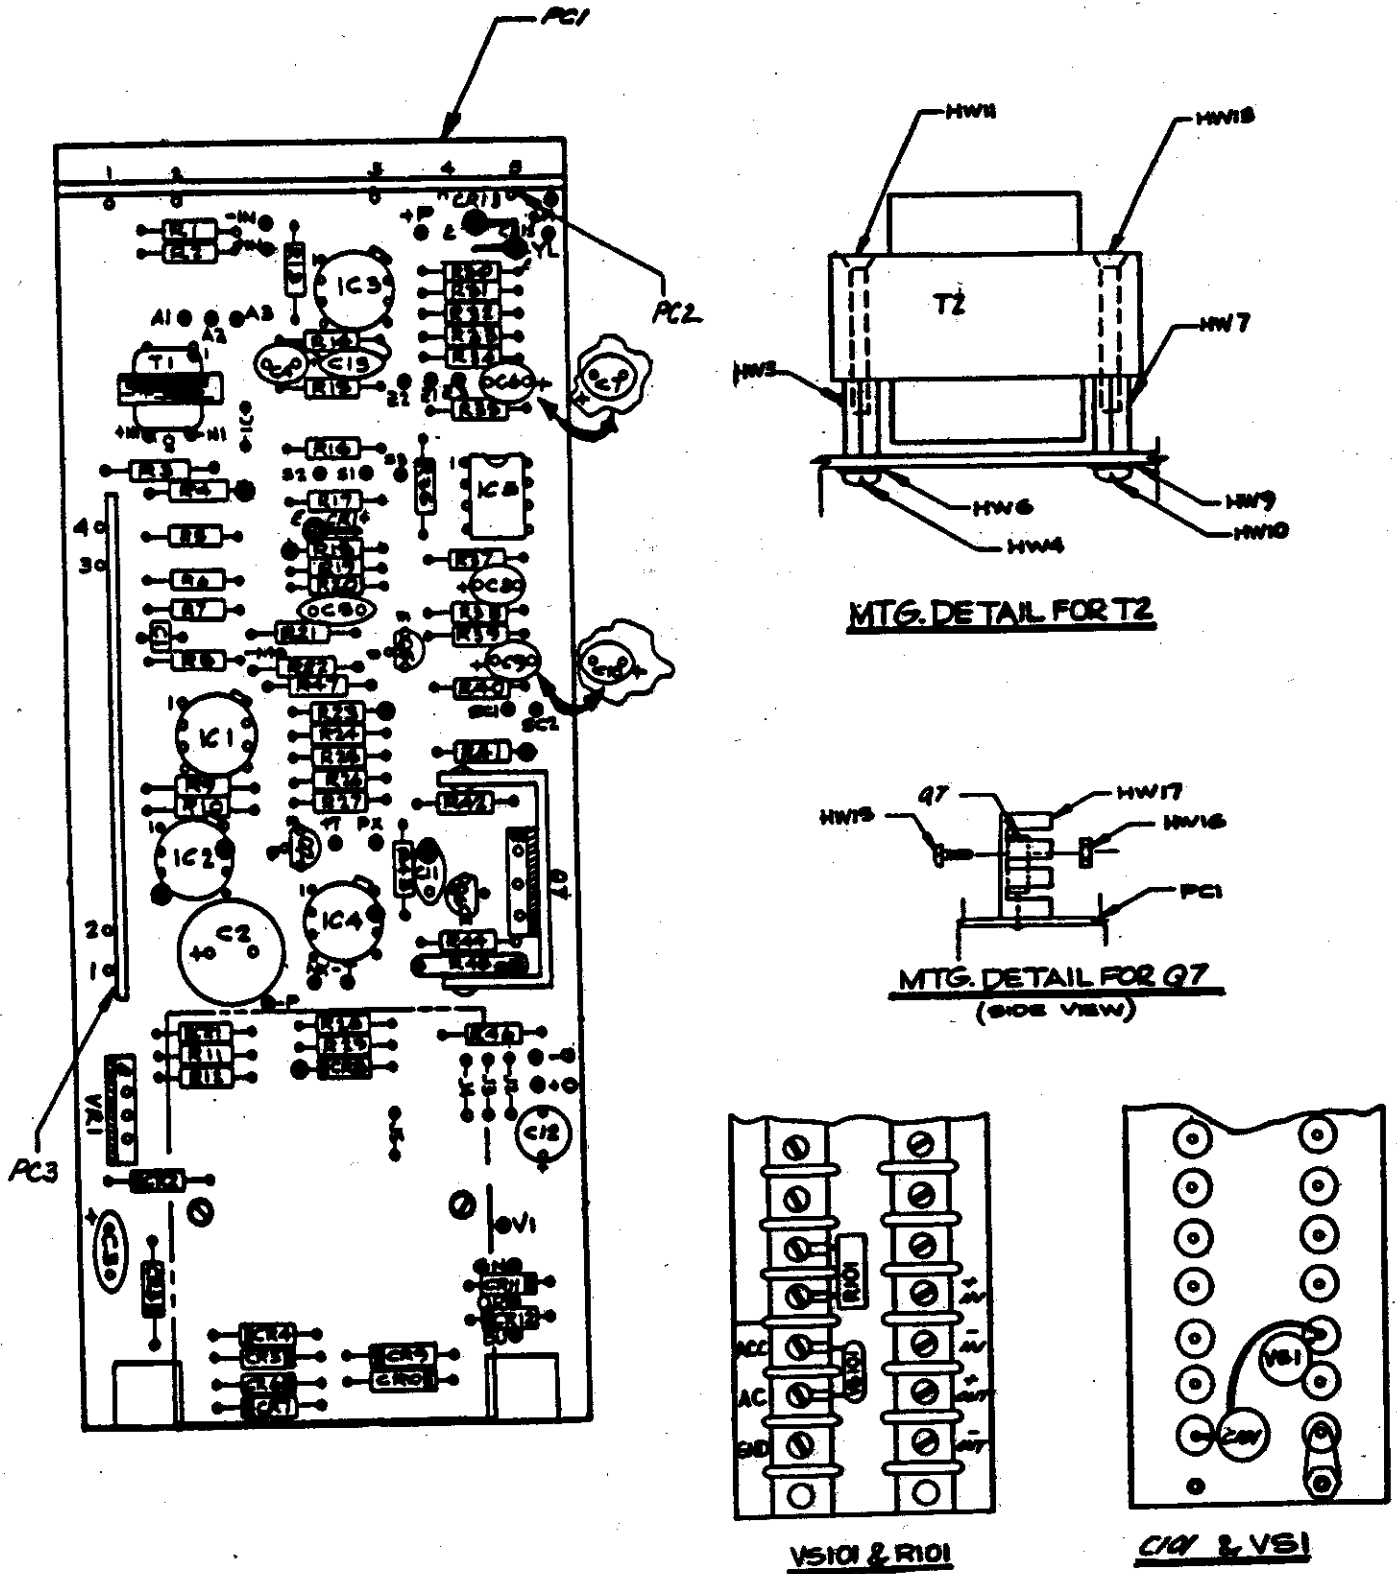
Printed Circuit Board (PC1) Assembly for Standard FDT Transmitter
